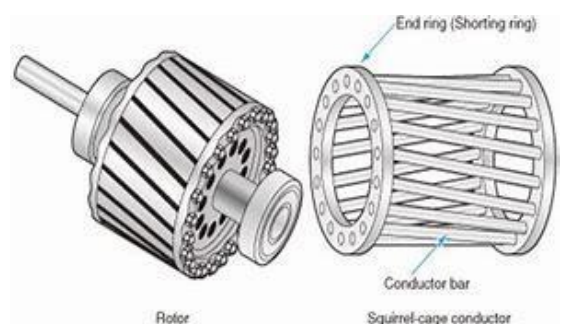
Examples of in Squirrel Cage Rotor [04]
